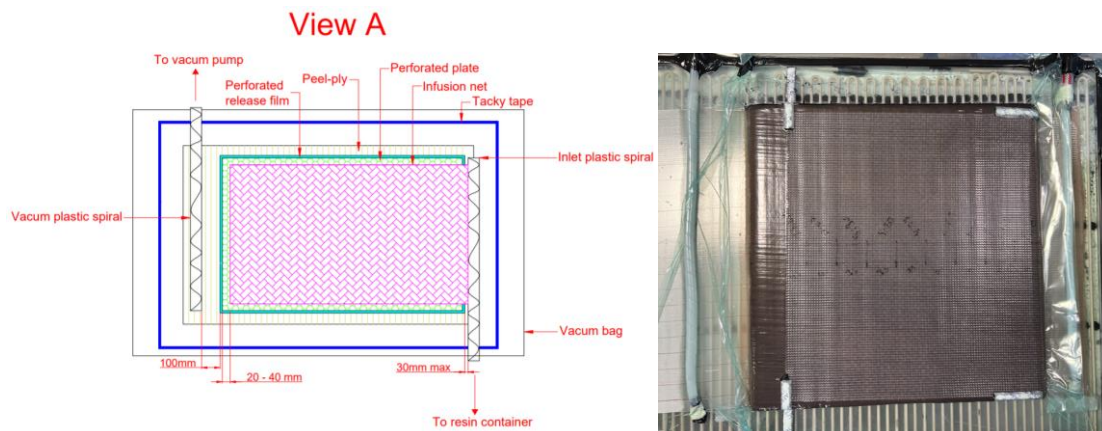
Top view of vacuum-assisted resin infusion set up (left) and manufactured laminate (right)
